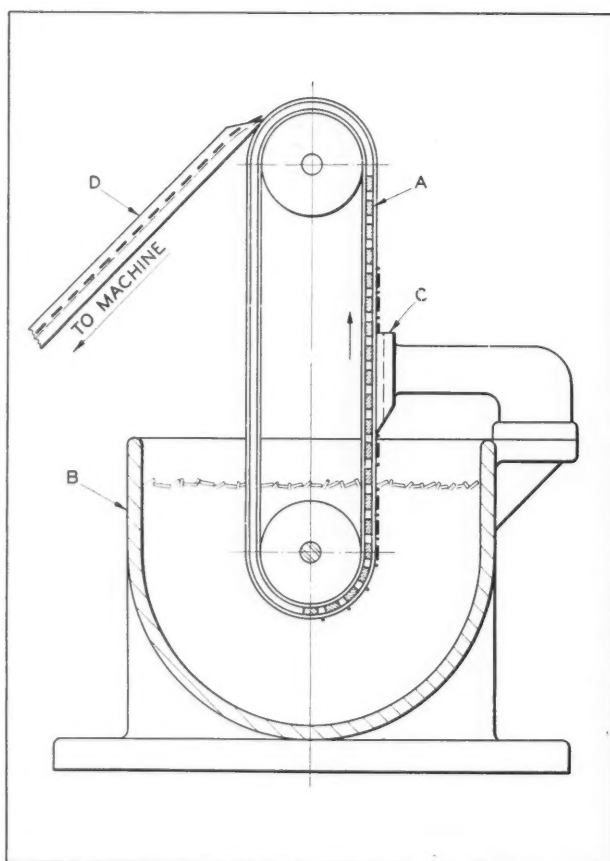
Alnico magnets are incorporated in this hopper. Parts are picked up by magnets attached to a conveyor belt and are carried to a track for feeding to a machine
